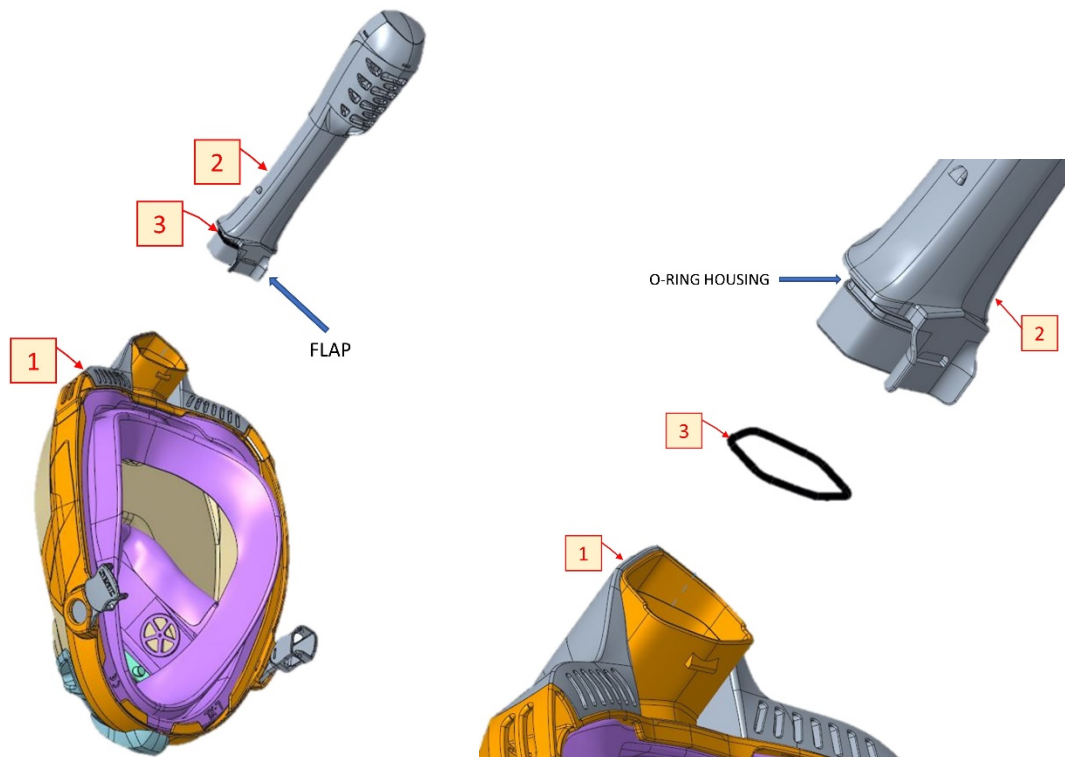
Left: Removal of the snorkel. Right: Removal of the o-ring.
